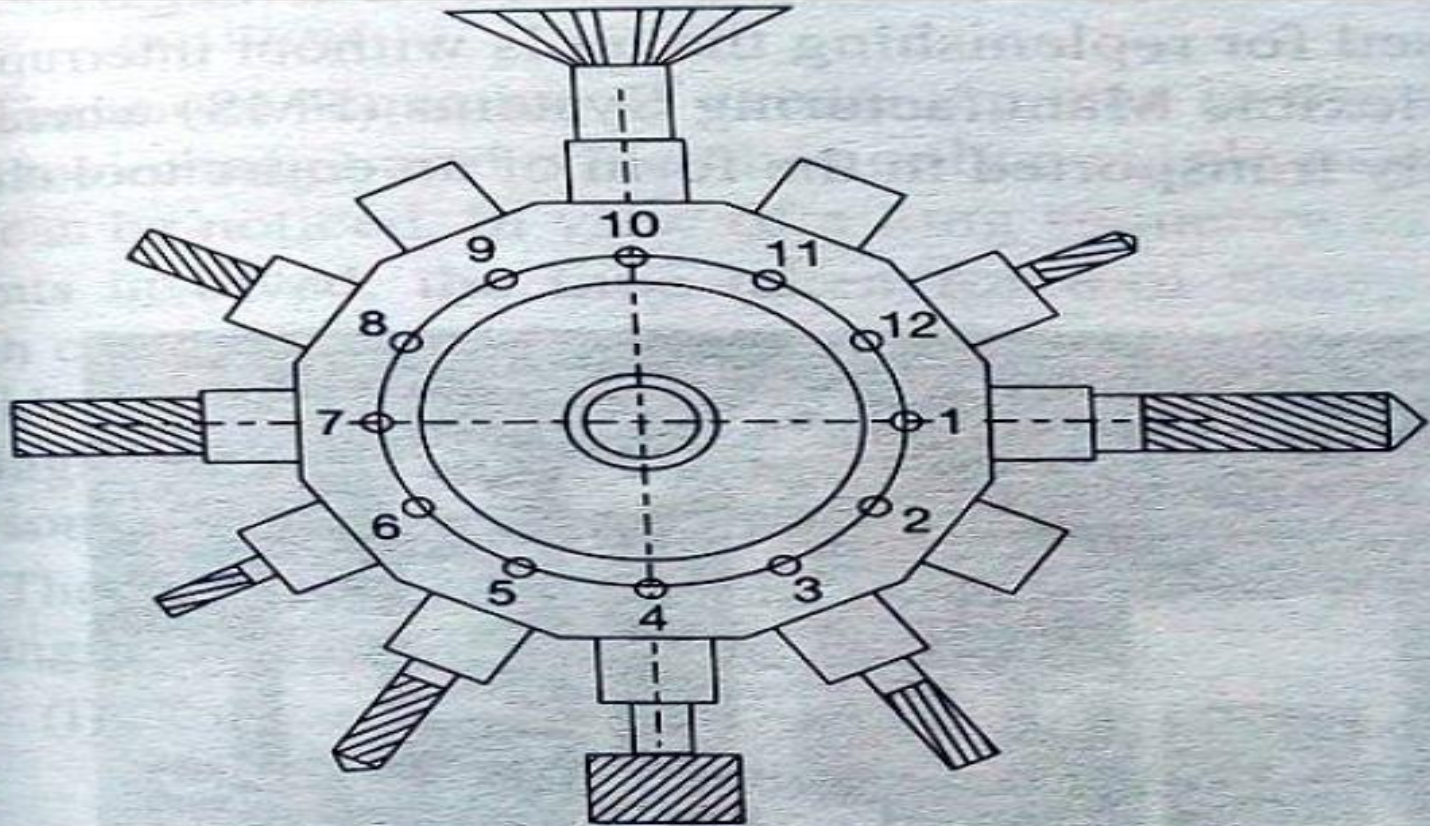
Typical tool turret used in CNC drilling/milling machines
